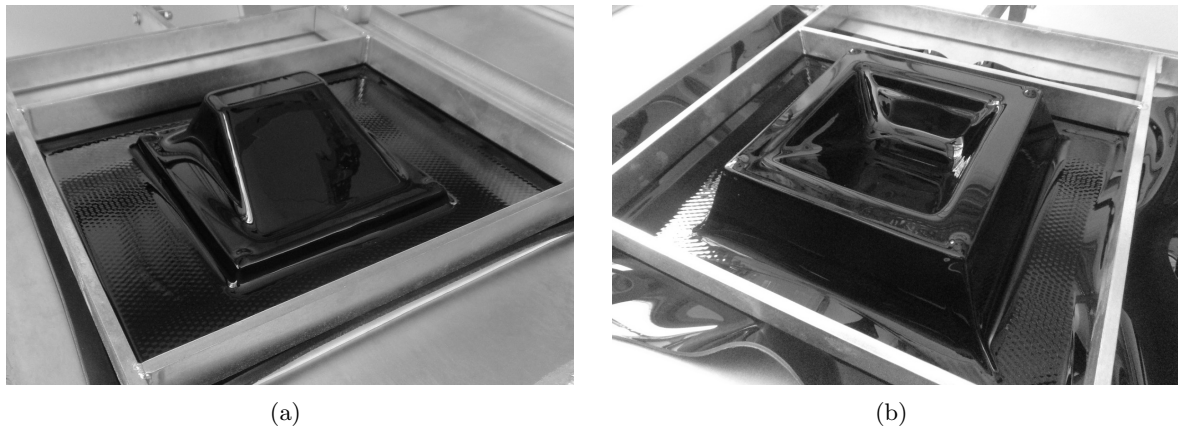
Thermoforming with SPIF sheet metal moulds: (a) positive mould on thermoforming machine during vacuum; (b) negative mould on thermoforming machine during vacuum
